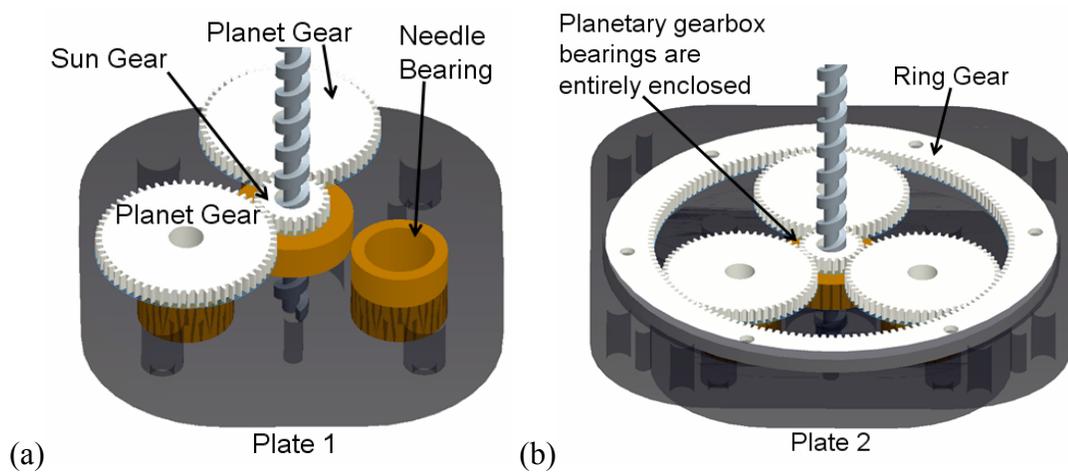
Delrin plates that house (a) bearings and (b) planetary gear box.
